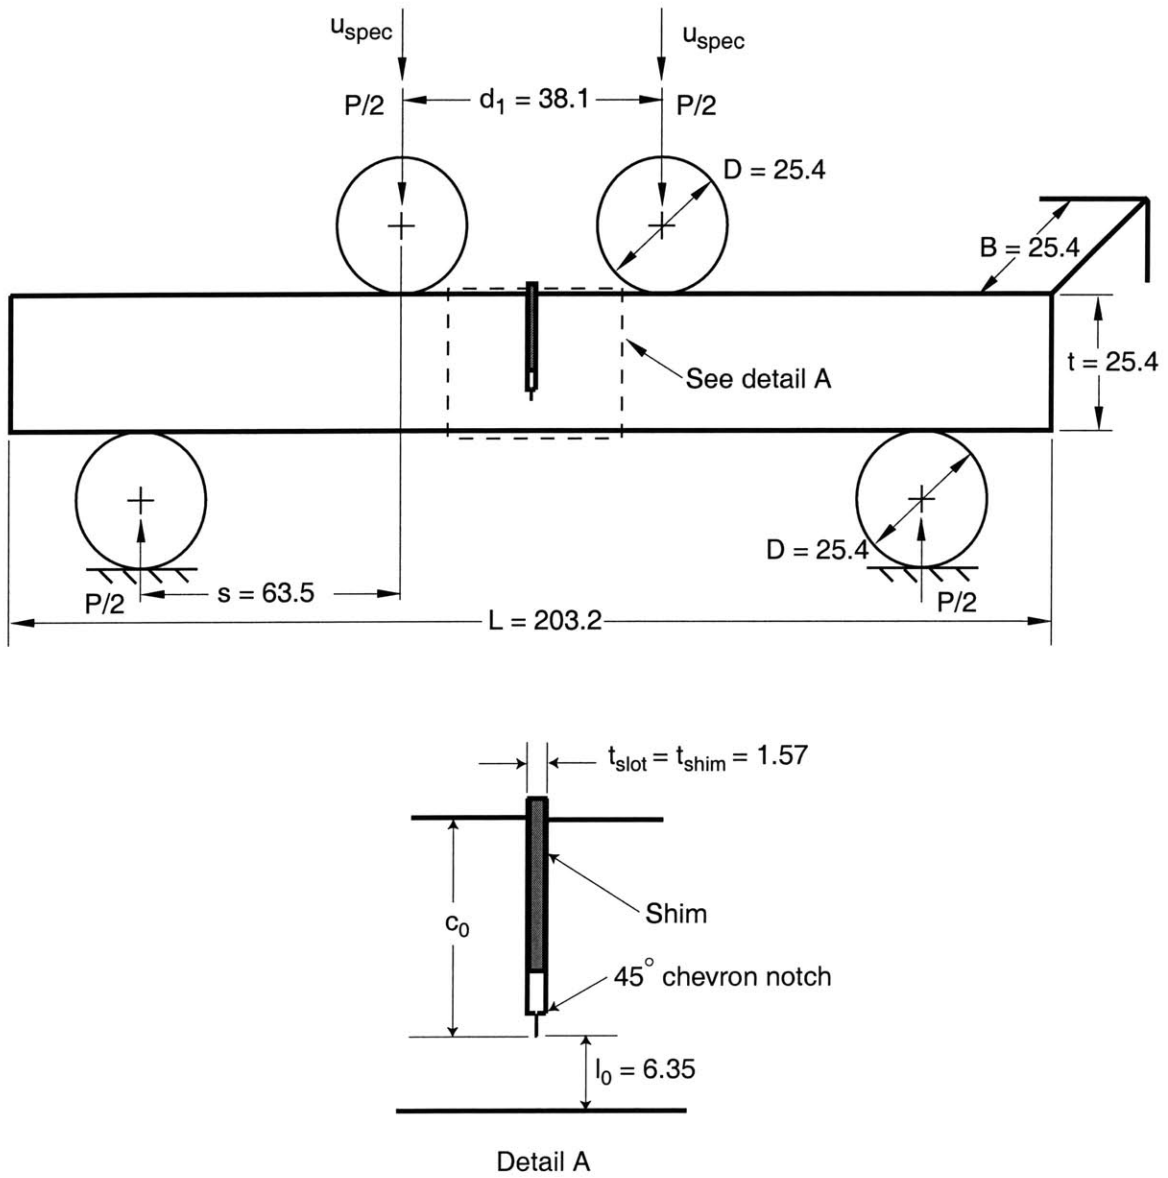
Back-bend test specimen geometry. All dimensions in mm.
